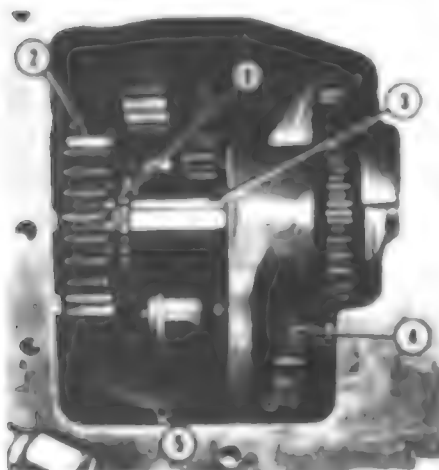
View of the lube pump on Models 684, 784 and 884 with the MCV removed.
